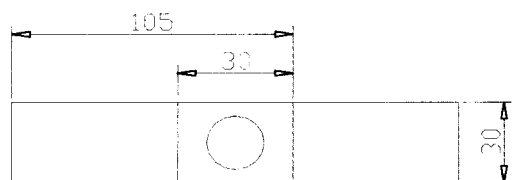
Specimen of tensile-shear test for spot welding (unit = mm)
